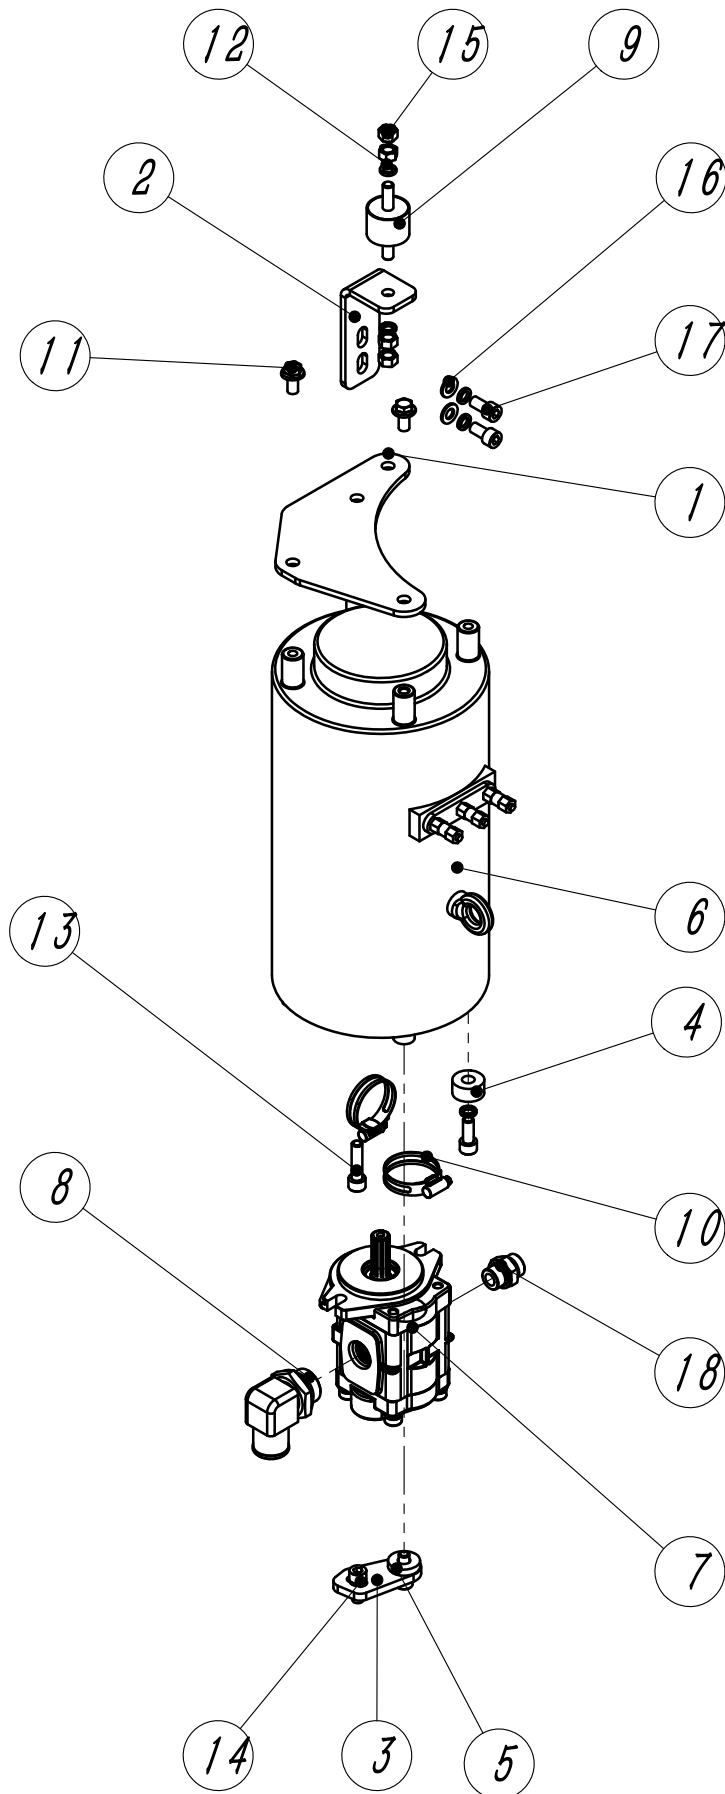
MQC35.3.1 Hydraulic tank assembly
